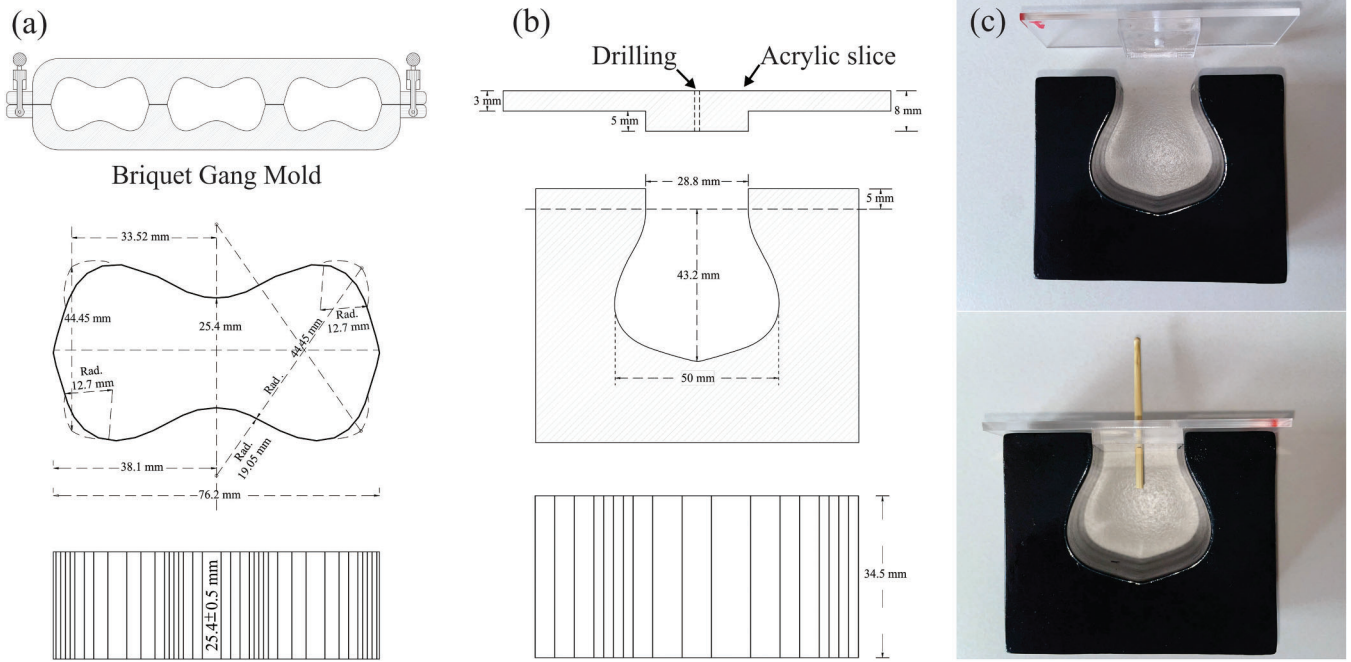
Mold elaboration. (a) Mold with standard dimensions, (b) Mold with modified dimensions, (c) Fabricated mold.
